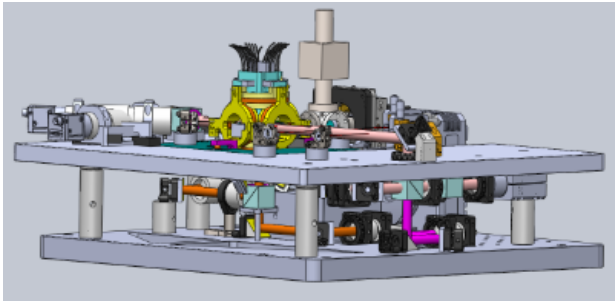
CAD drawing of the compact system showing the atom chip tower and coil assembly.
